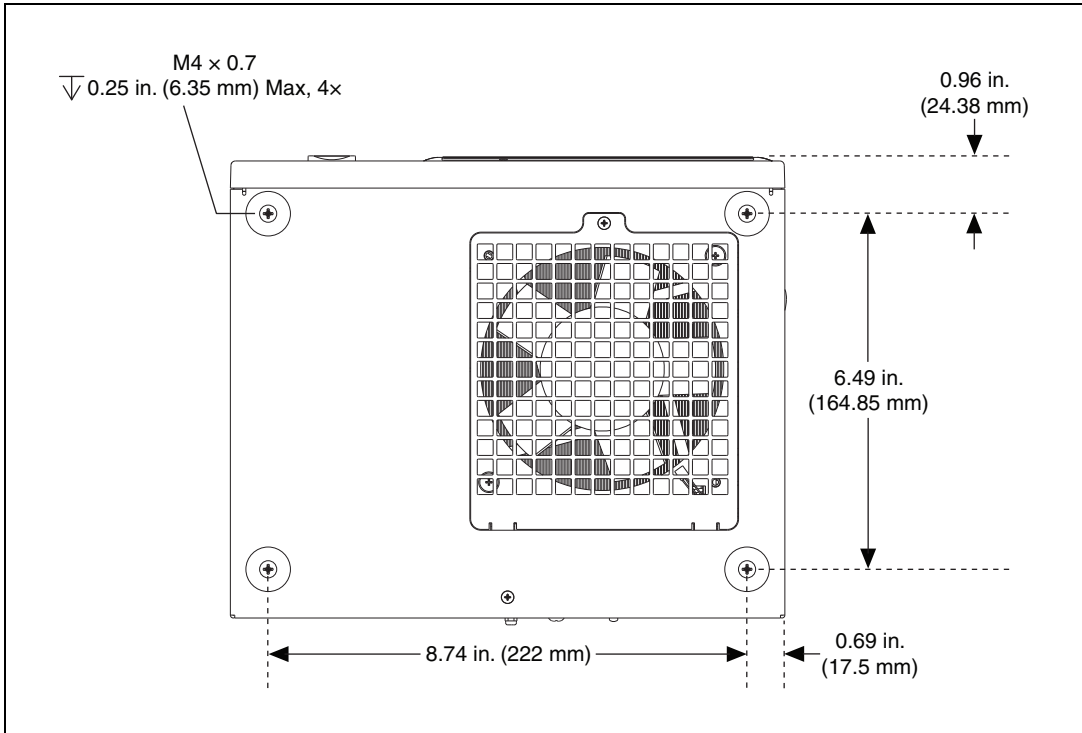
NI PXIe-1073 Chassis Dimensions (Bottom)
